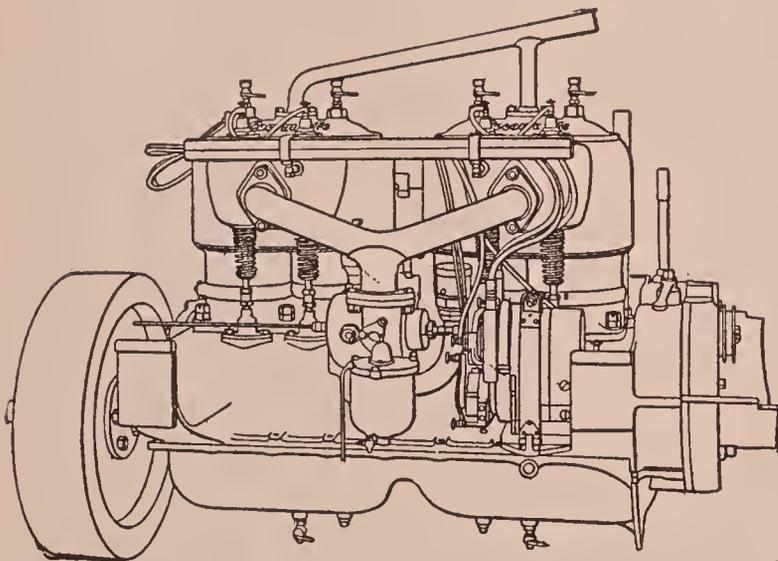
Appearance of the carburetor or inlet side of the motor, when complete outside of the frame.
